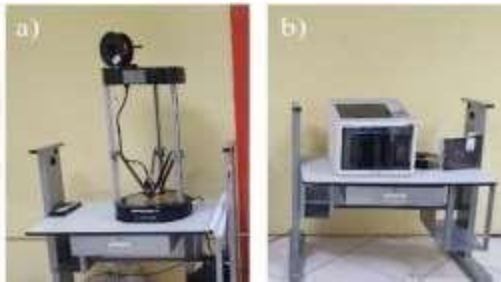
a) Rostock 3D printer and b) 3DWox1 printer.
